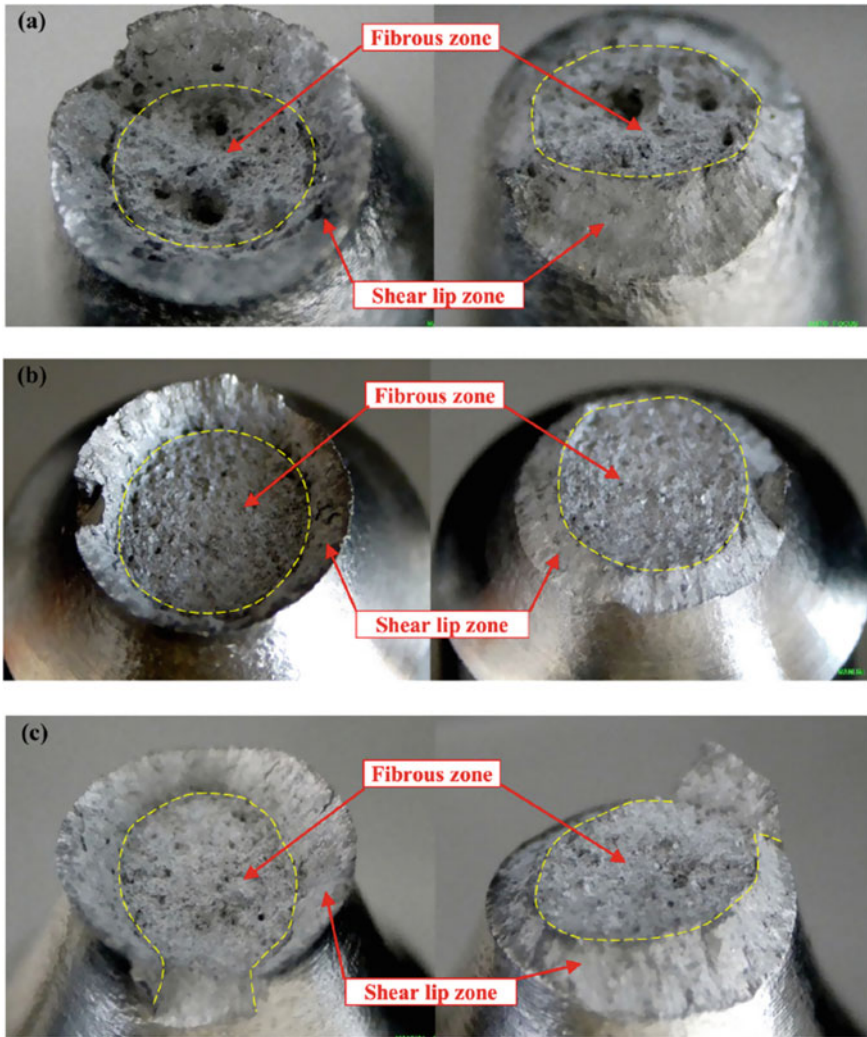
The macroscopic fracture surface of SRB and NRB specimen: a SRB; b NRB-R3; c NRB-R12
